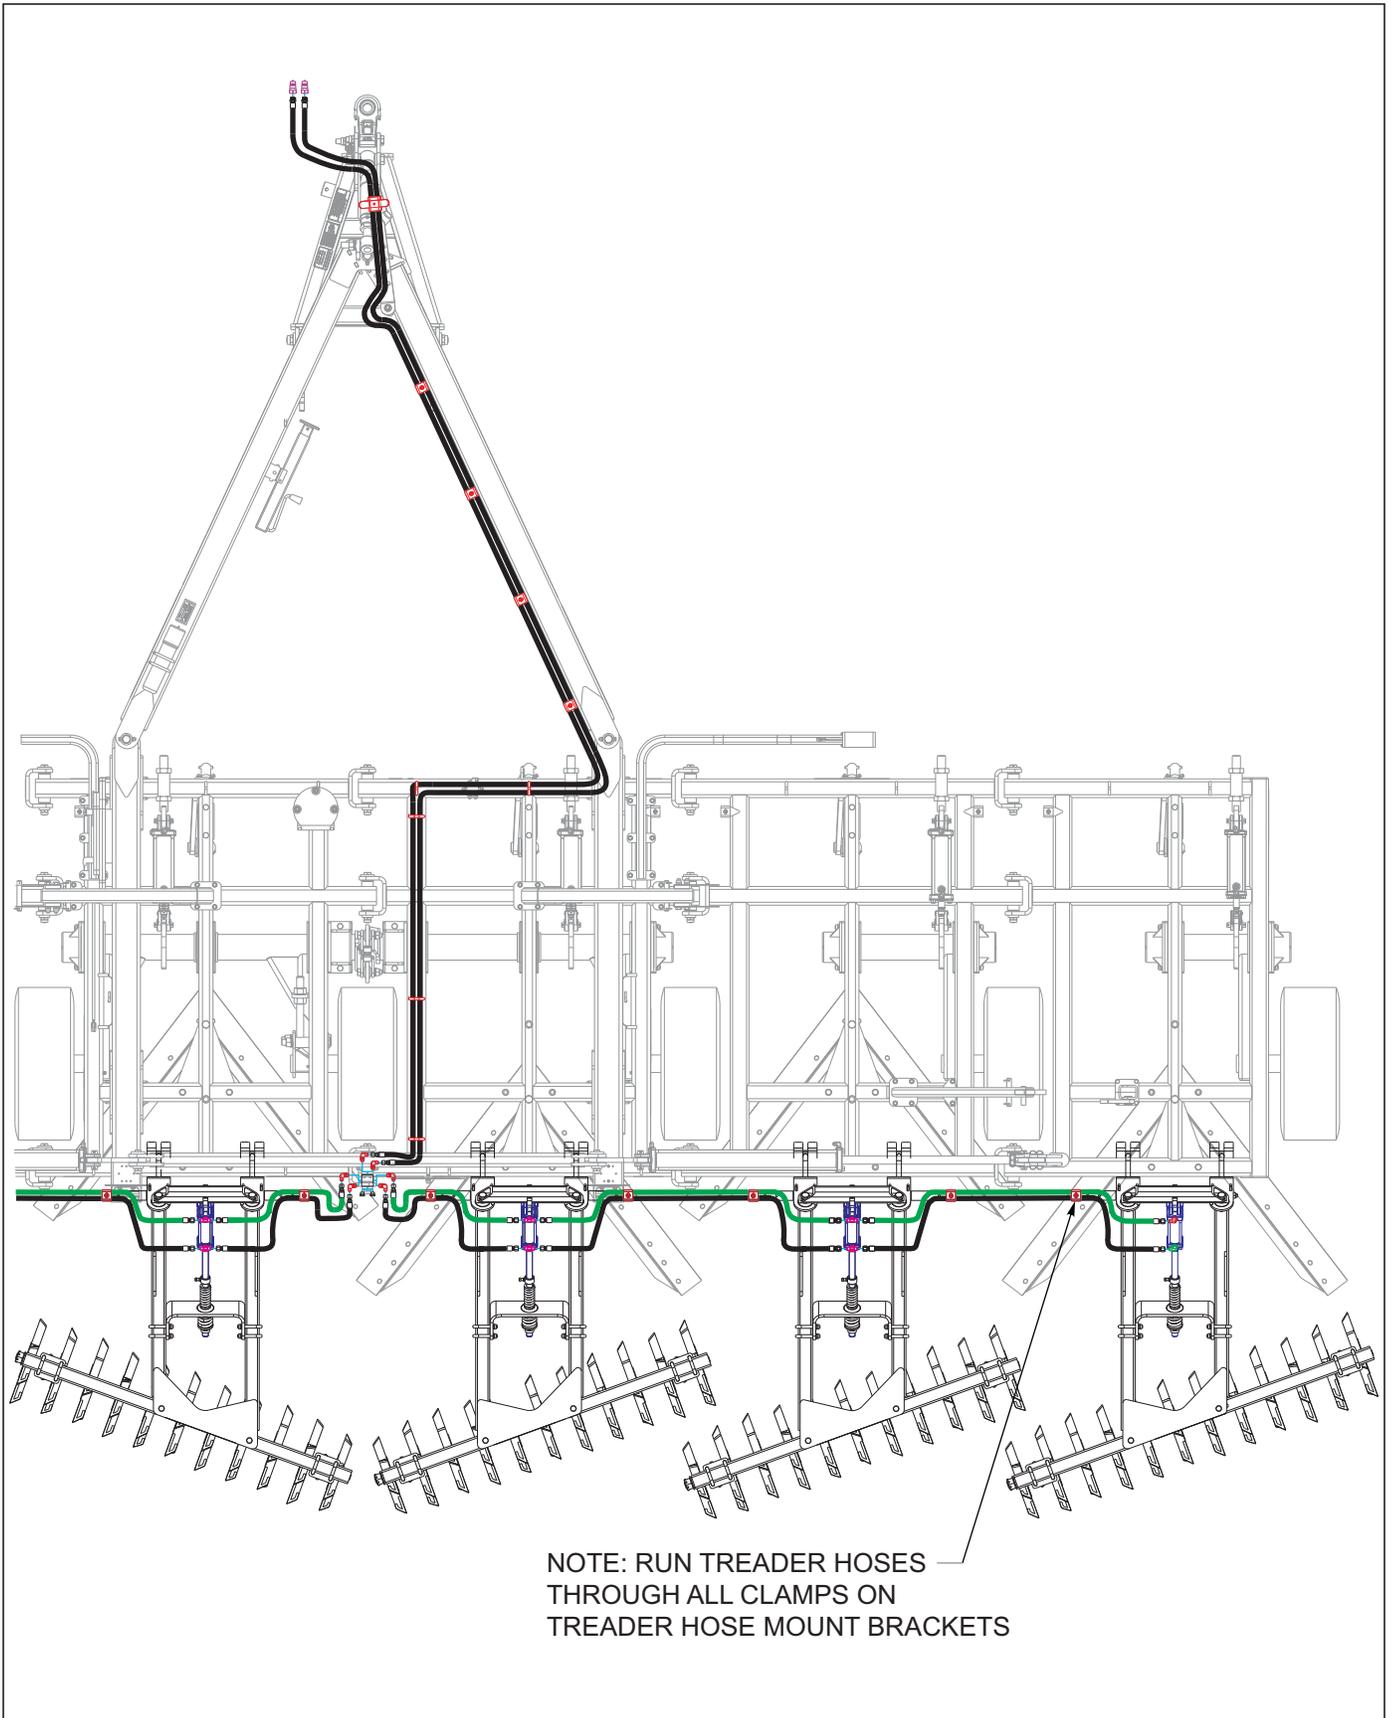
Treader Hydraulic Layout LH 1760-35'
